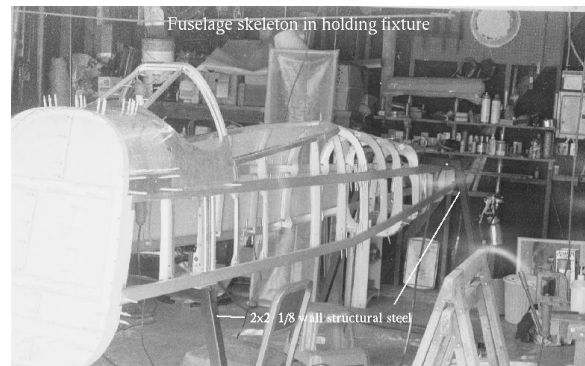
A simple fixture to hold the fuselage in alignment. Begin by supporting the forward end at the forward wing attach brackets and the aft end at the horizontal stabilizer attach brackets. Later on you will need to move the aft support point to the lift tube.
